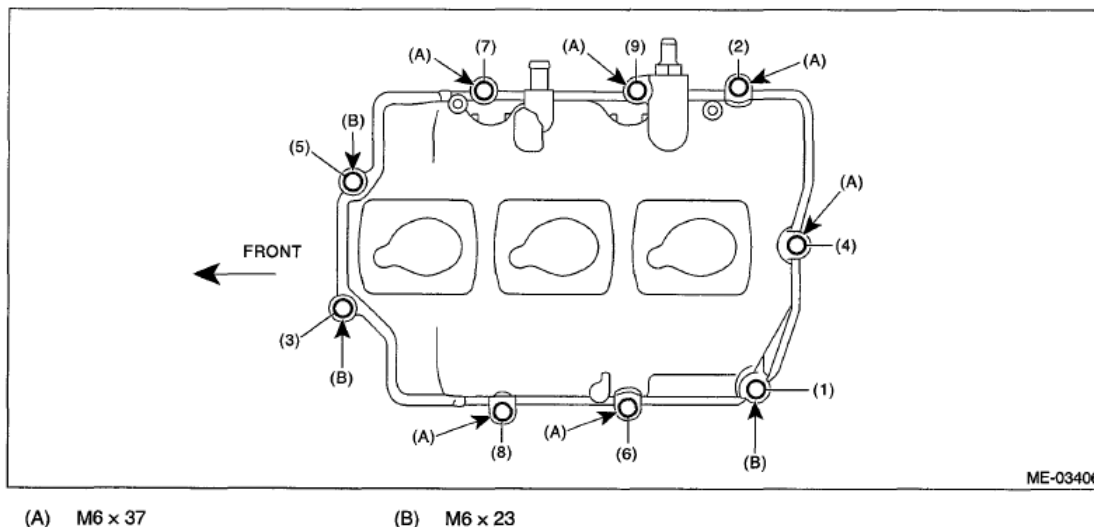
Identifying Rocker Cover Bolt In Sequence (LH Side)
